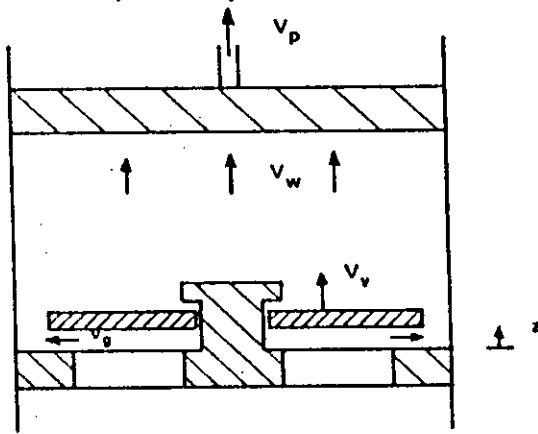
Schematic drawing of the foot valve of a reciprocating piston pump (27).
